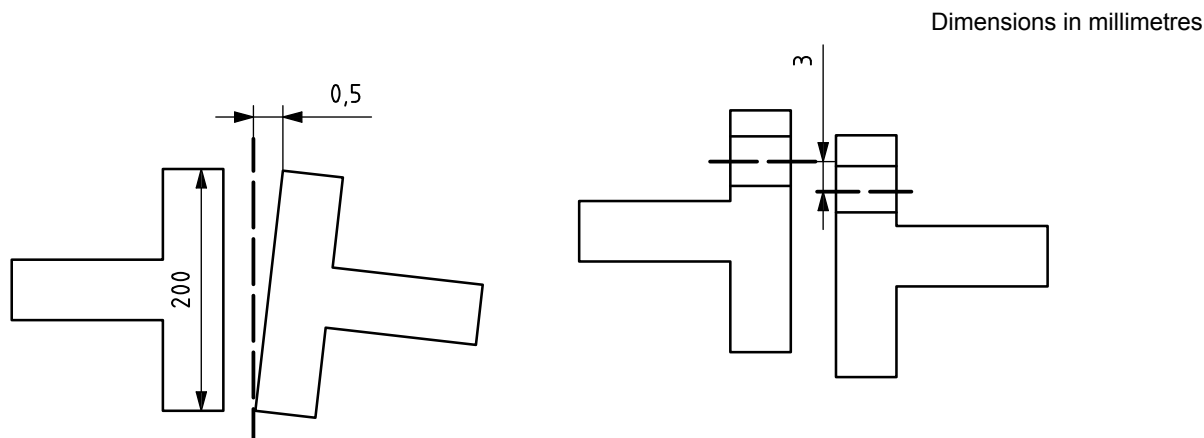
Flange-to-flange alignment tolerances
